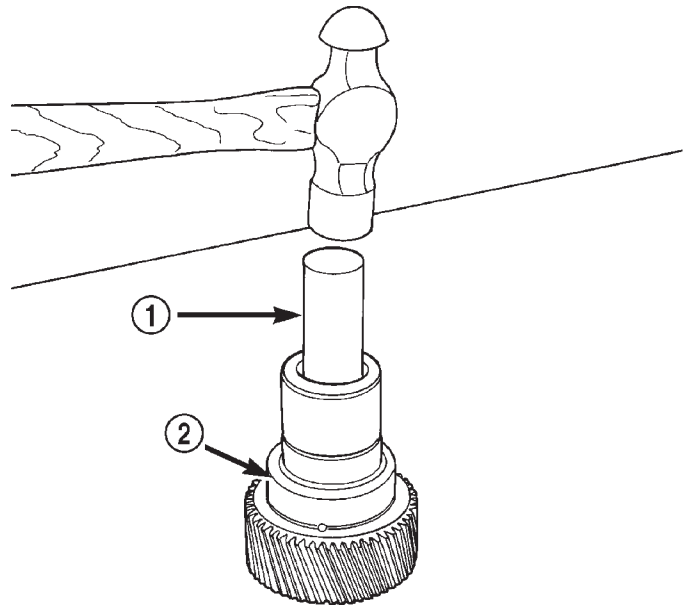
Seating Input Shaft Bearing J8921-219
